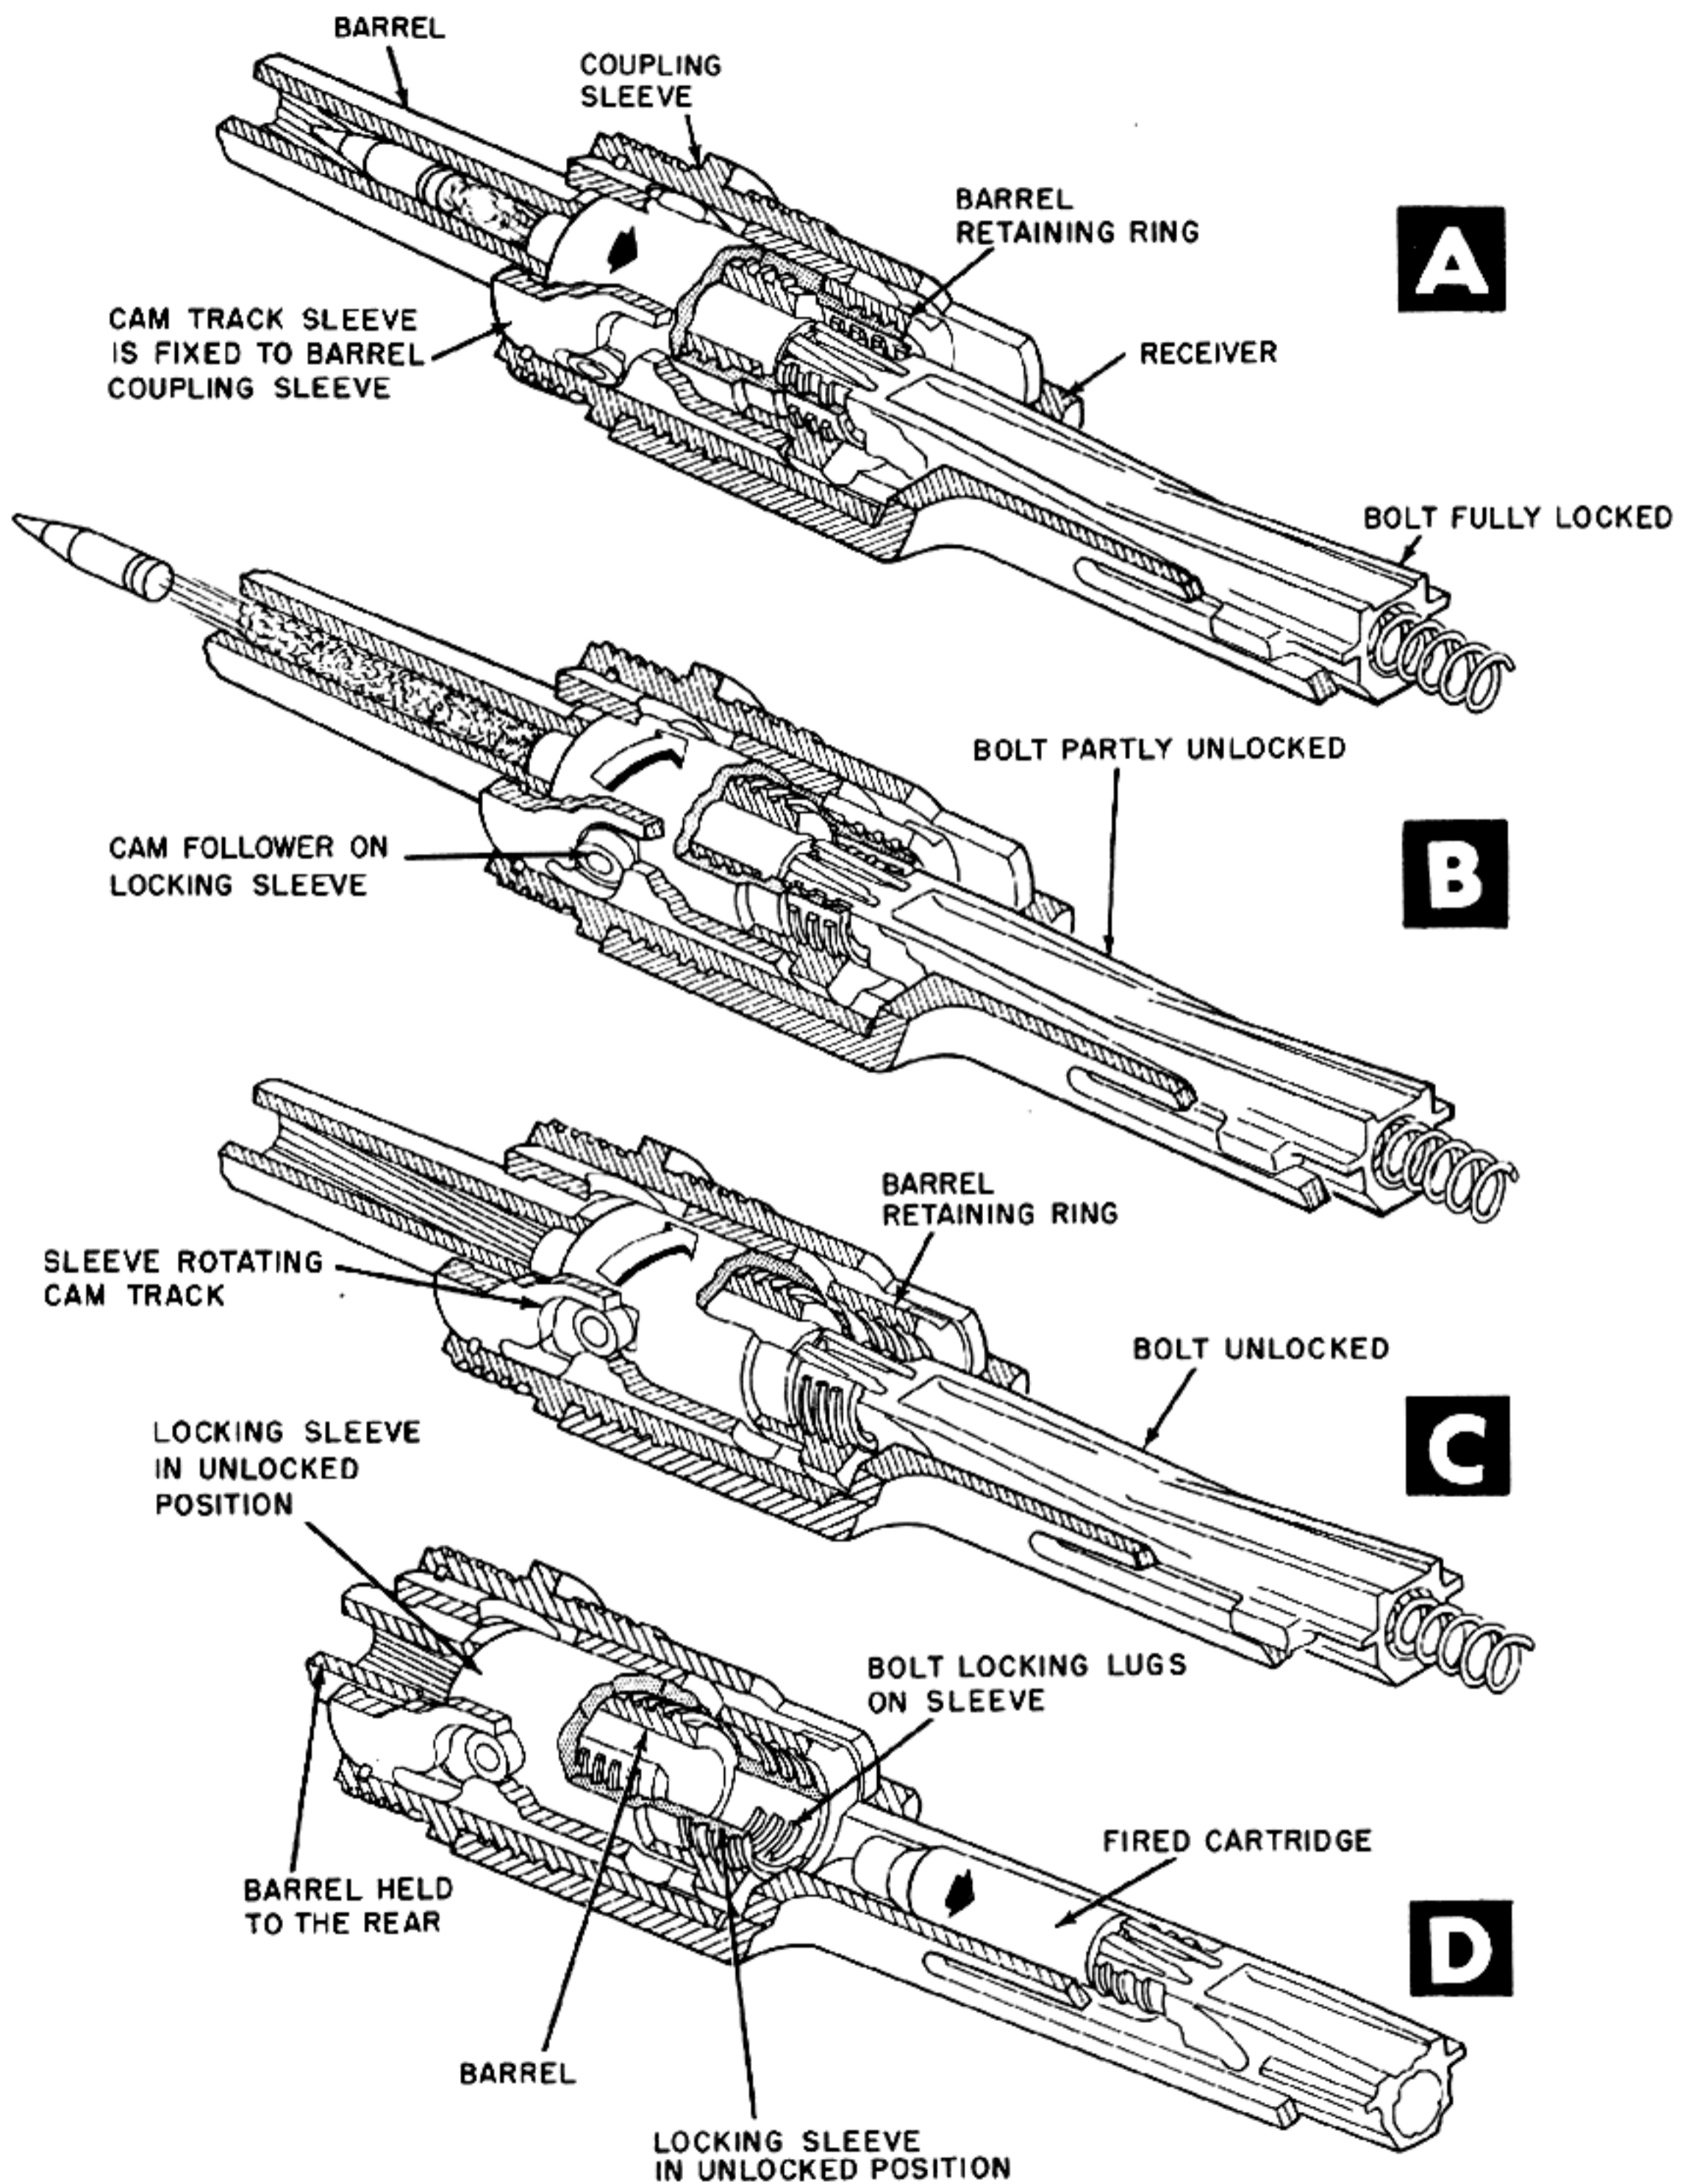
Cam Groove in Receiver Causes Locking Sleeve To Rotate, Unlocking the Bolt.
